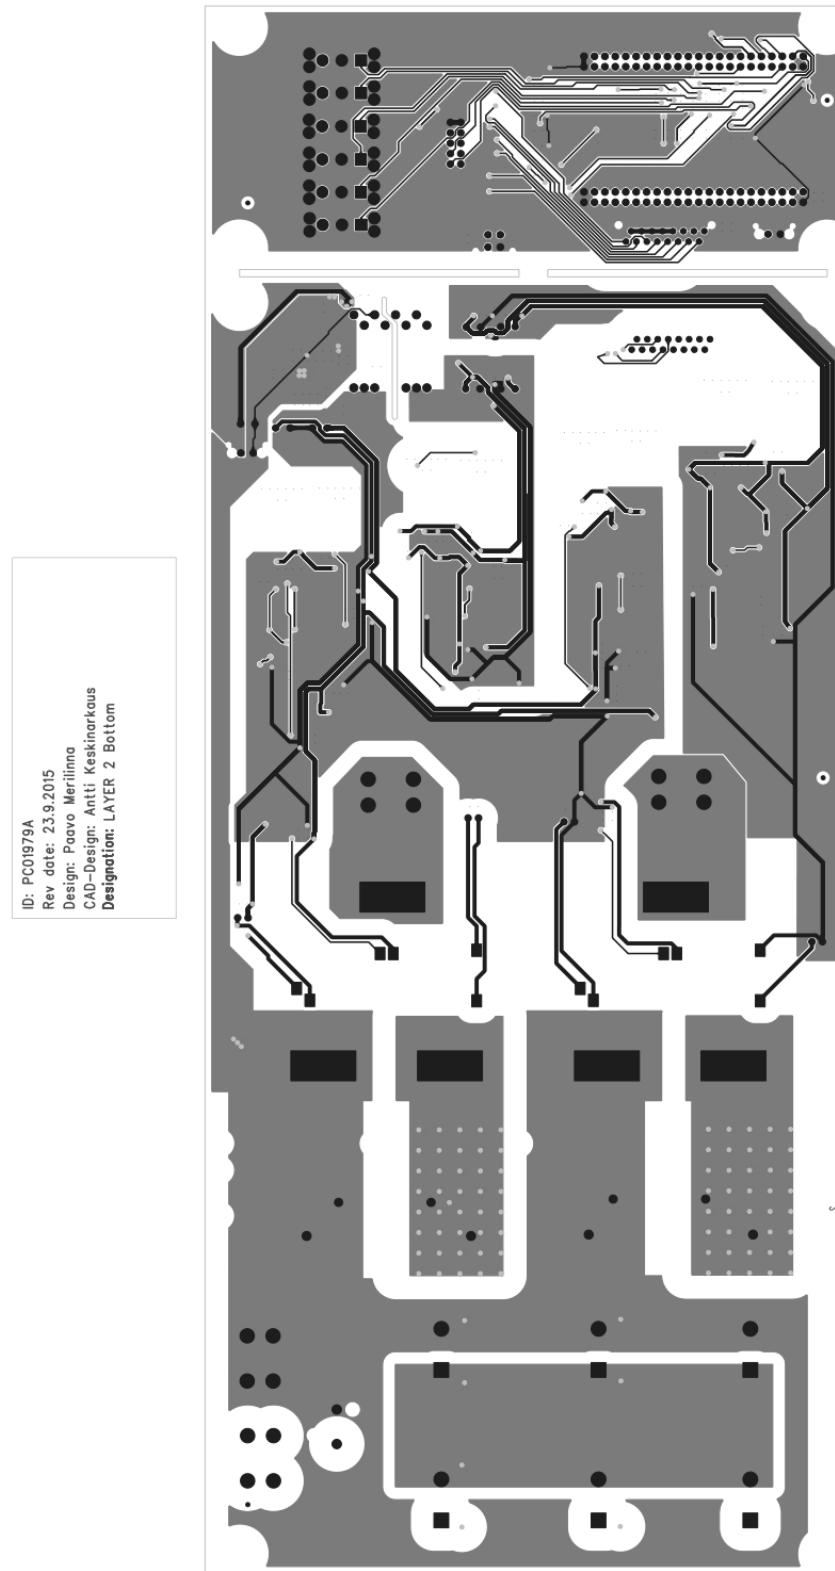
Bottom-side layout image of the studied prototyping board (70CPE1979A)
